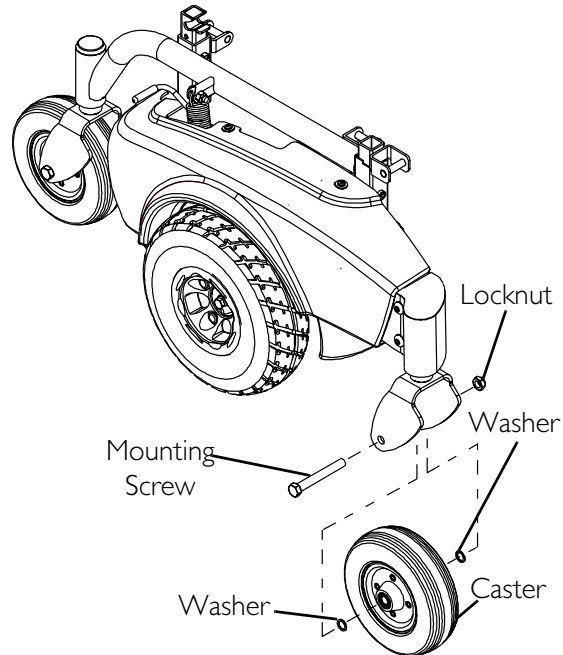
Replacing the Front/Rear Caster Assemblies
